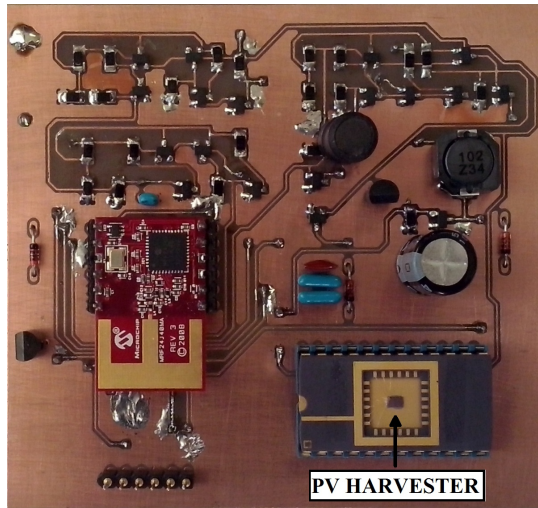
Photograph of the system prototype (dimensions: 80×90 mm)
